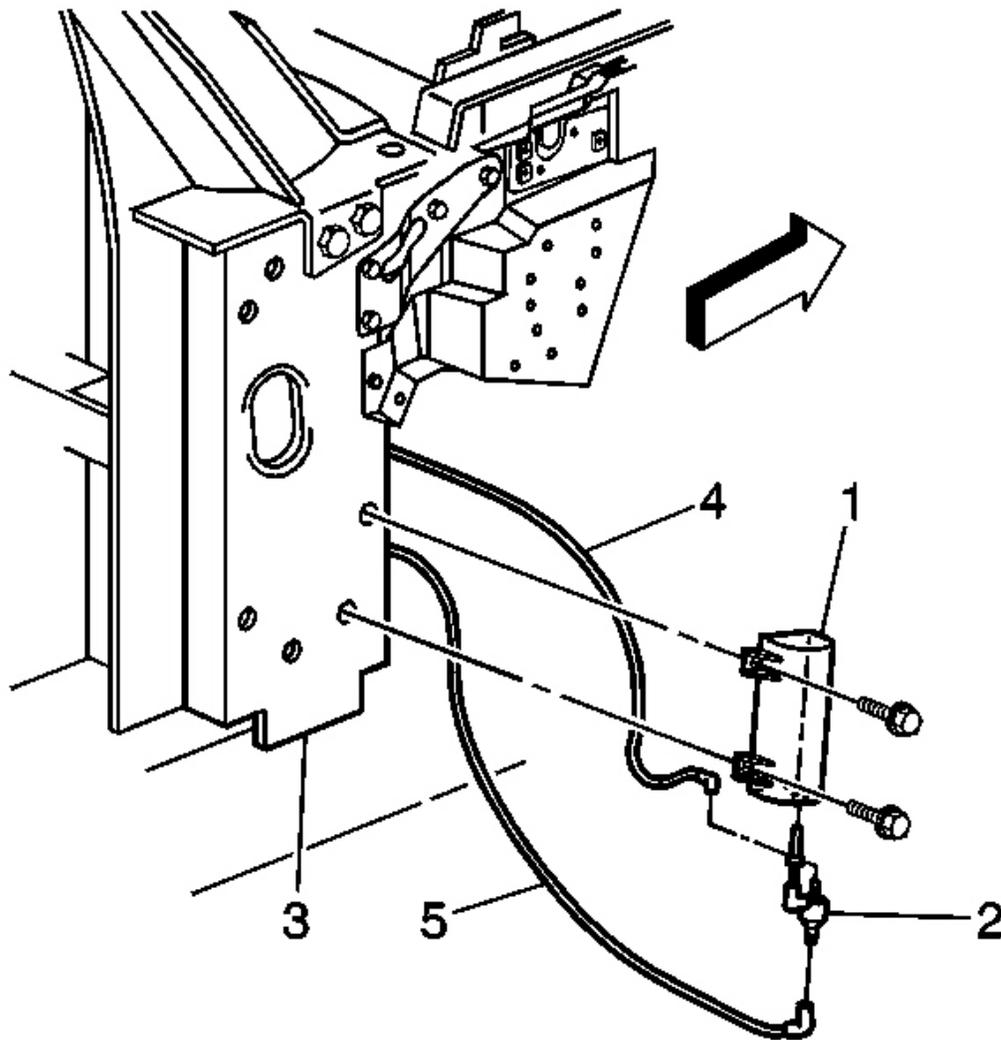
Engine Harness Vacuum Connector, Hinge Pillar, Vacuum Tank & I/P Harness Vacuum Connector
